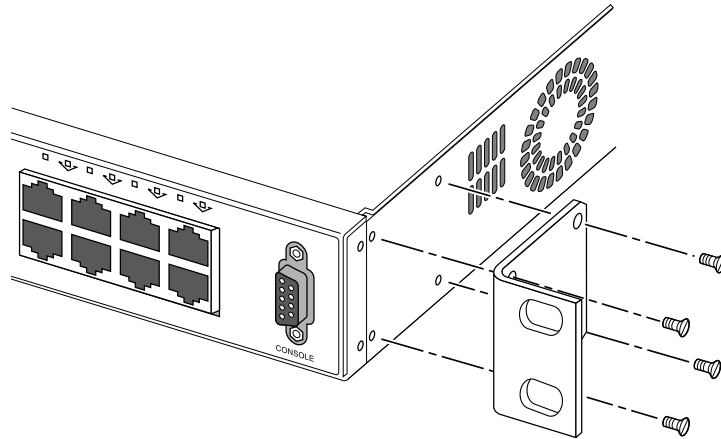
Attaching the Mounting Bracket: Summit X350, X440, X450, X450a, and X450e
